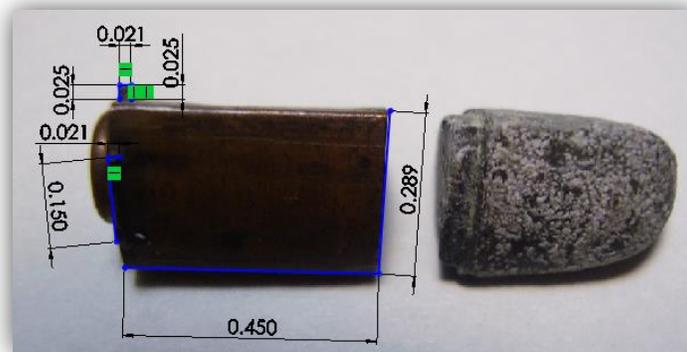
Side View of Cartridge with Length Measurements and Ear Dimensions [14, modified 11/2012]
